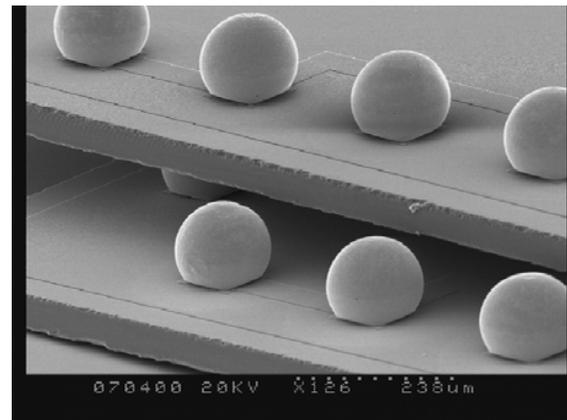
SEM picture of 55 μm thin single chips; solder ball bumping was performed after thinning.
